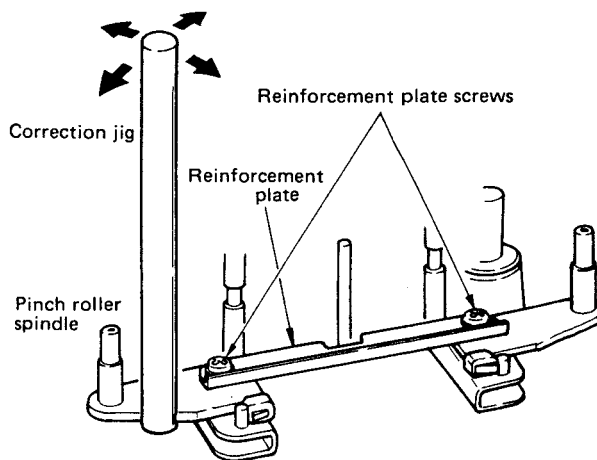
Example of improperly aligned pinch roller and capstan
